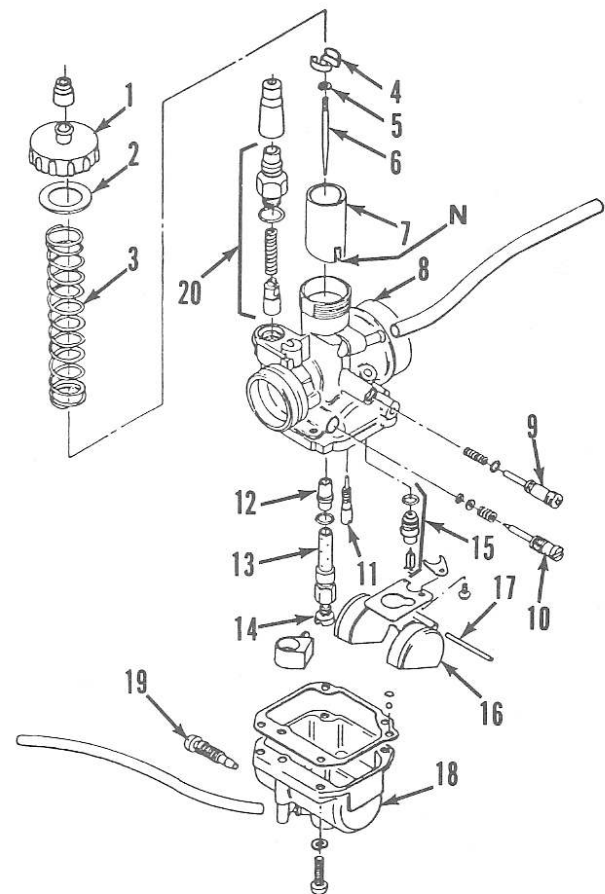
Exploded view of Mikuni VM22SS carburetor used on all models.
